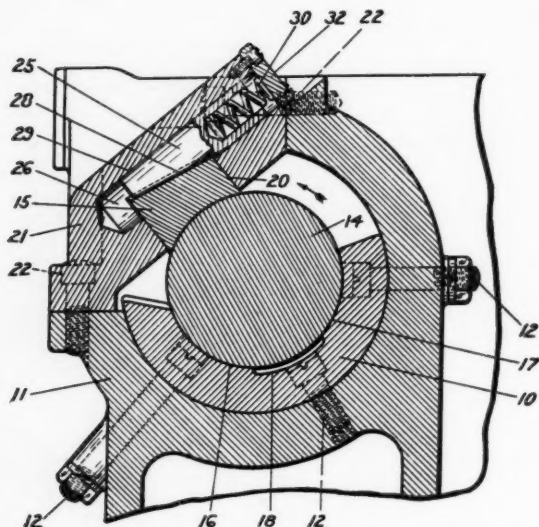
Vertical section of unit showing floating bearing held by locking pin 25
